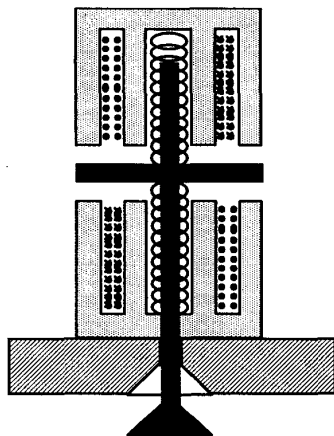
A conceptual drawing of one design for an electromechanical engine valve.
